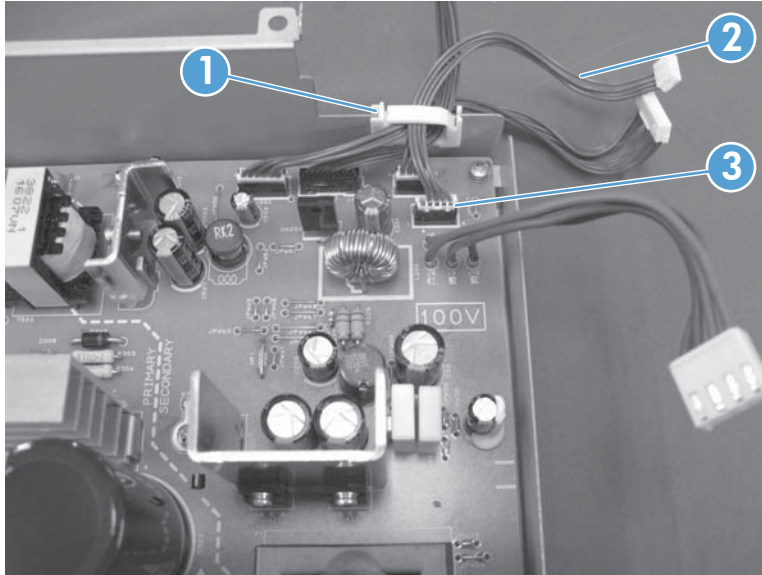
Remove the low-voltage power supply assembly (4 of 5)
